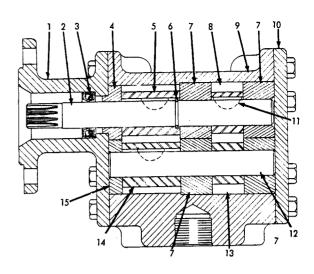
Transmission Oil Pump (HD6EP Prior to S/N 18754, HD7G Prior to S/N 24276)
